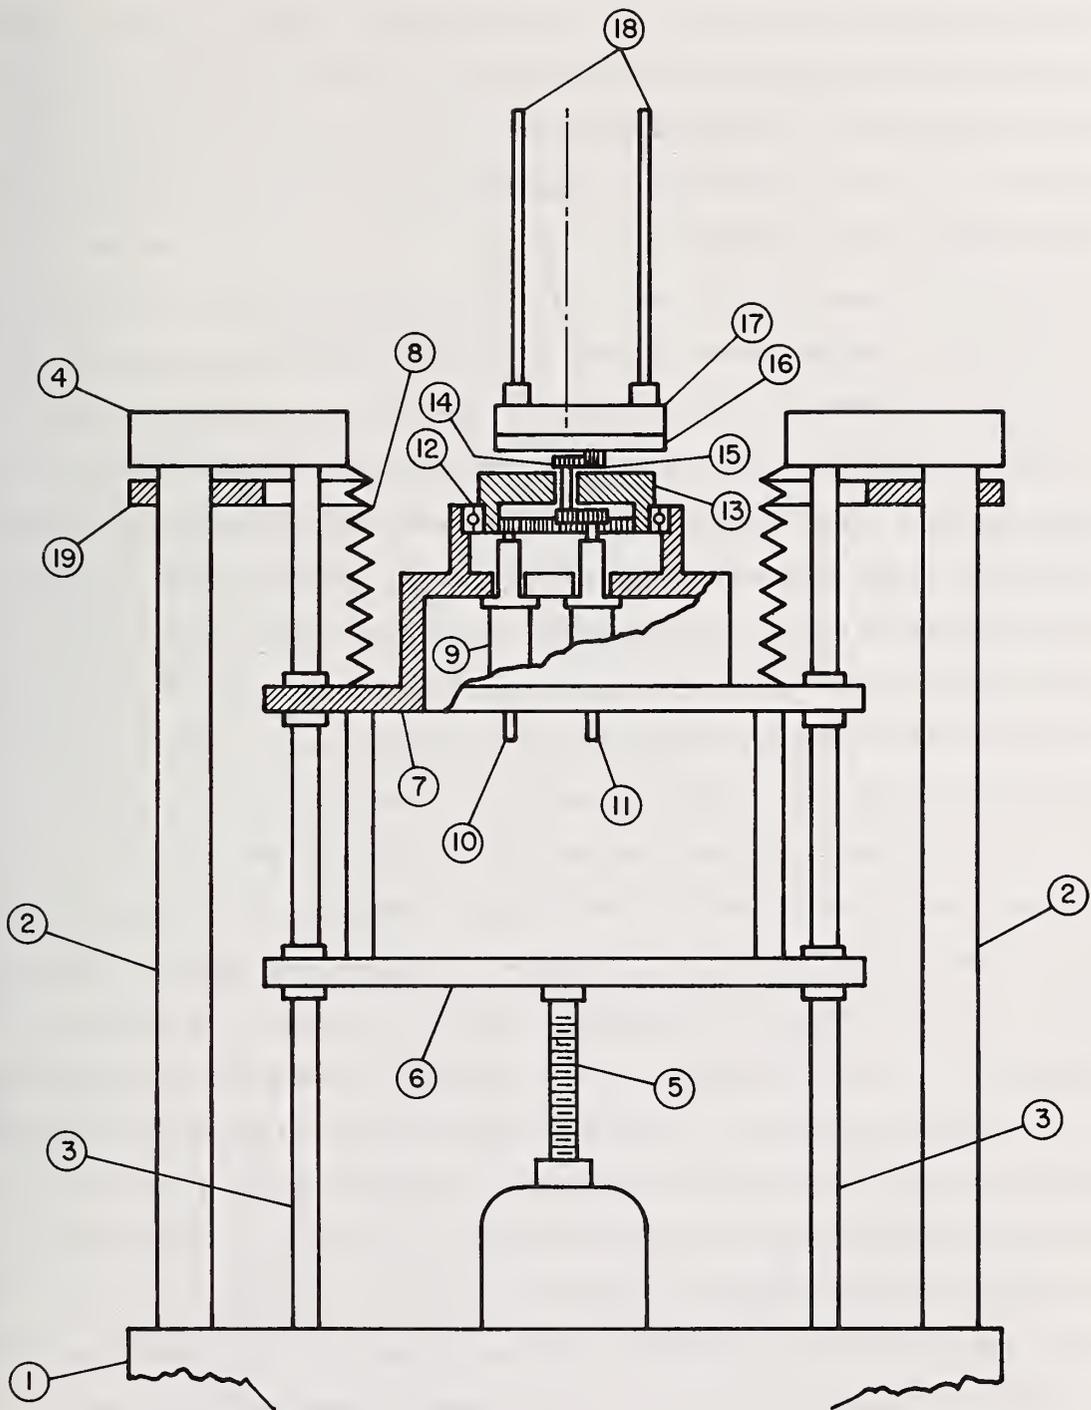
Target Pedestal Assembly. The components are: (1) base, (2) support column, (3) guide rods, (4) scattering chamber baseplate, (5) jackscrew, (6) jacking flange, (7) bellows flange, (8) bellows, (9) rotary feed-thrus, (10) rotation driveshaft, (11) oscillation driveshaft, (12) turntable bearing, (13) turntable, (14) linear cam, (15) idler wheel, (16) translation stage, (17) target platform, (18) target ladder roads, (19) indicator ring.
